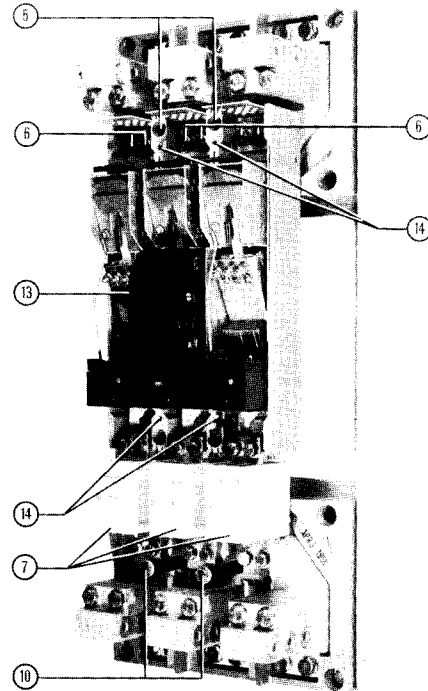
Front View of Circuit Breaker End Covers, Breaker Cover and Operating Handle Extension Removed.
